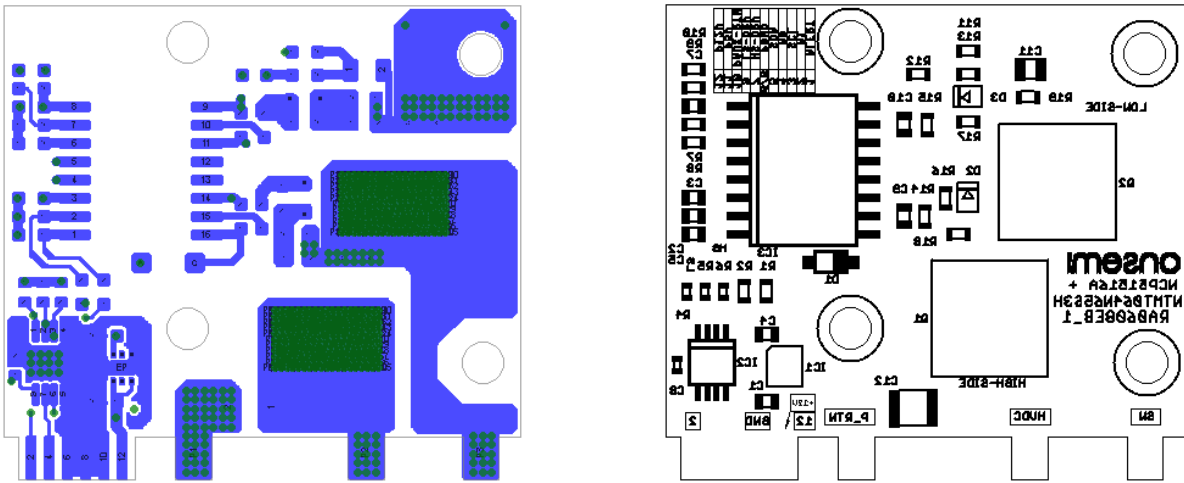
Bottom Layer PCB Layout and Assembly Plan of SLOW LEG CARD
